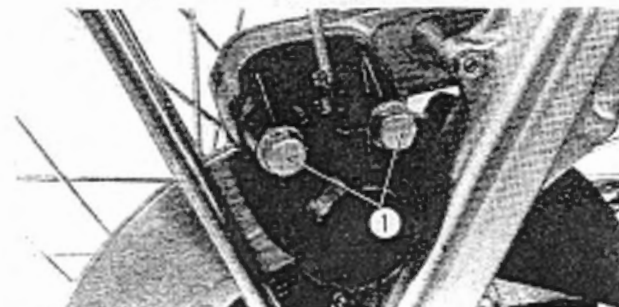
① 6 mm bolts ② Caliper adjusting bolt
